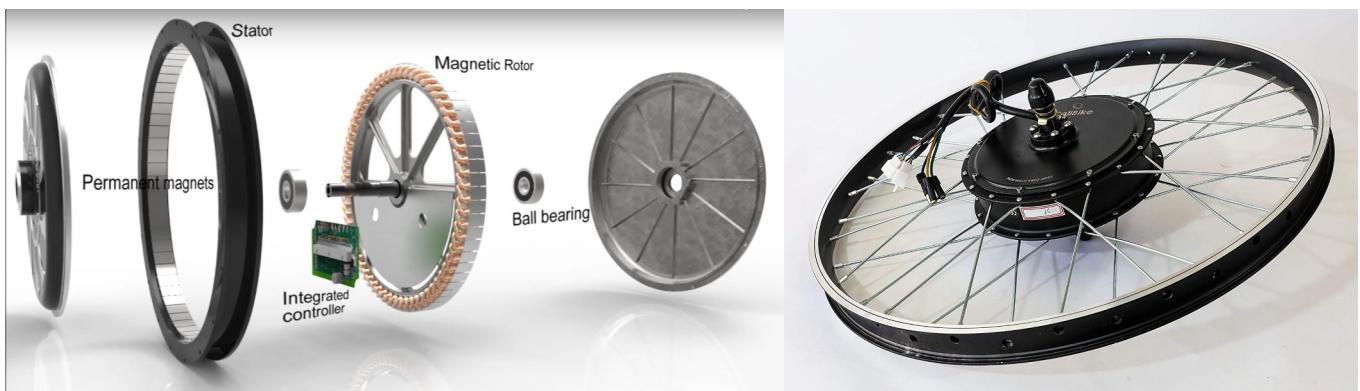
Internal components of a Out-runner type BLDC motor (hub motor)
